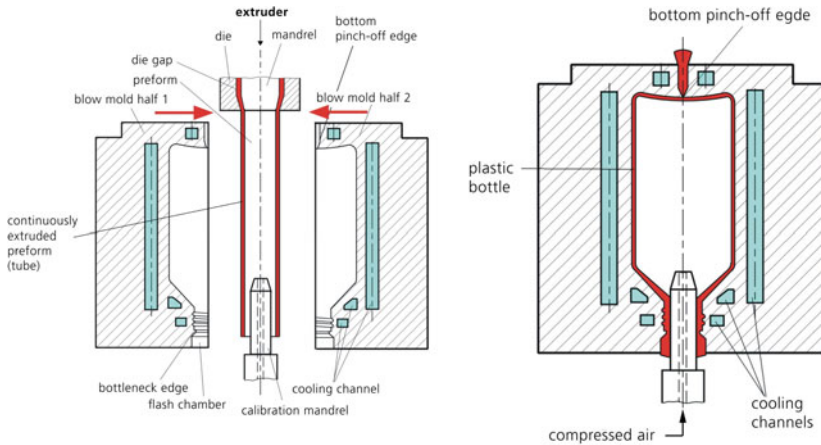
Extrusion blow molding (BASF, Ludwigshafen)
